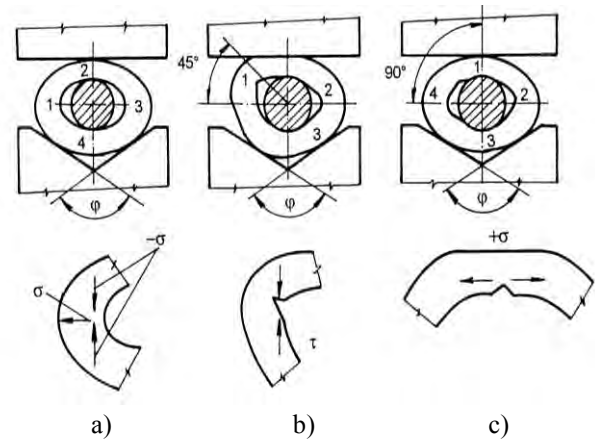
Diagram of formation of cracks and laps on the inner surface of the hollow body at press forging (1 to 4 – zones of the forged piece)
